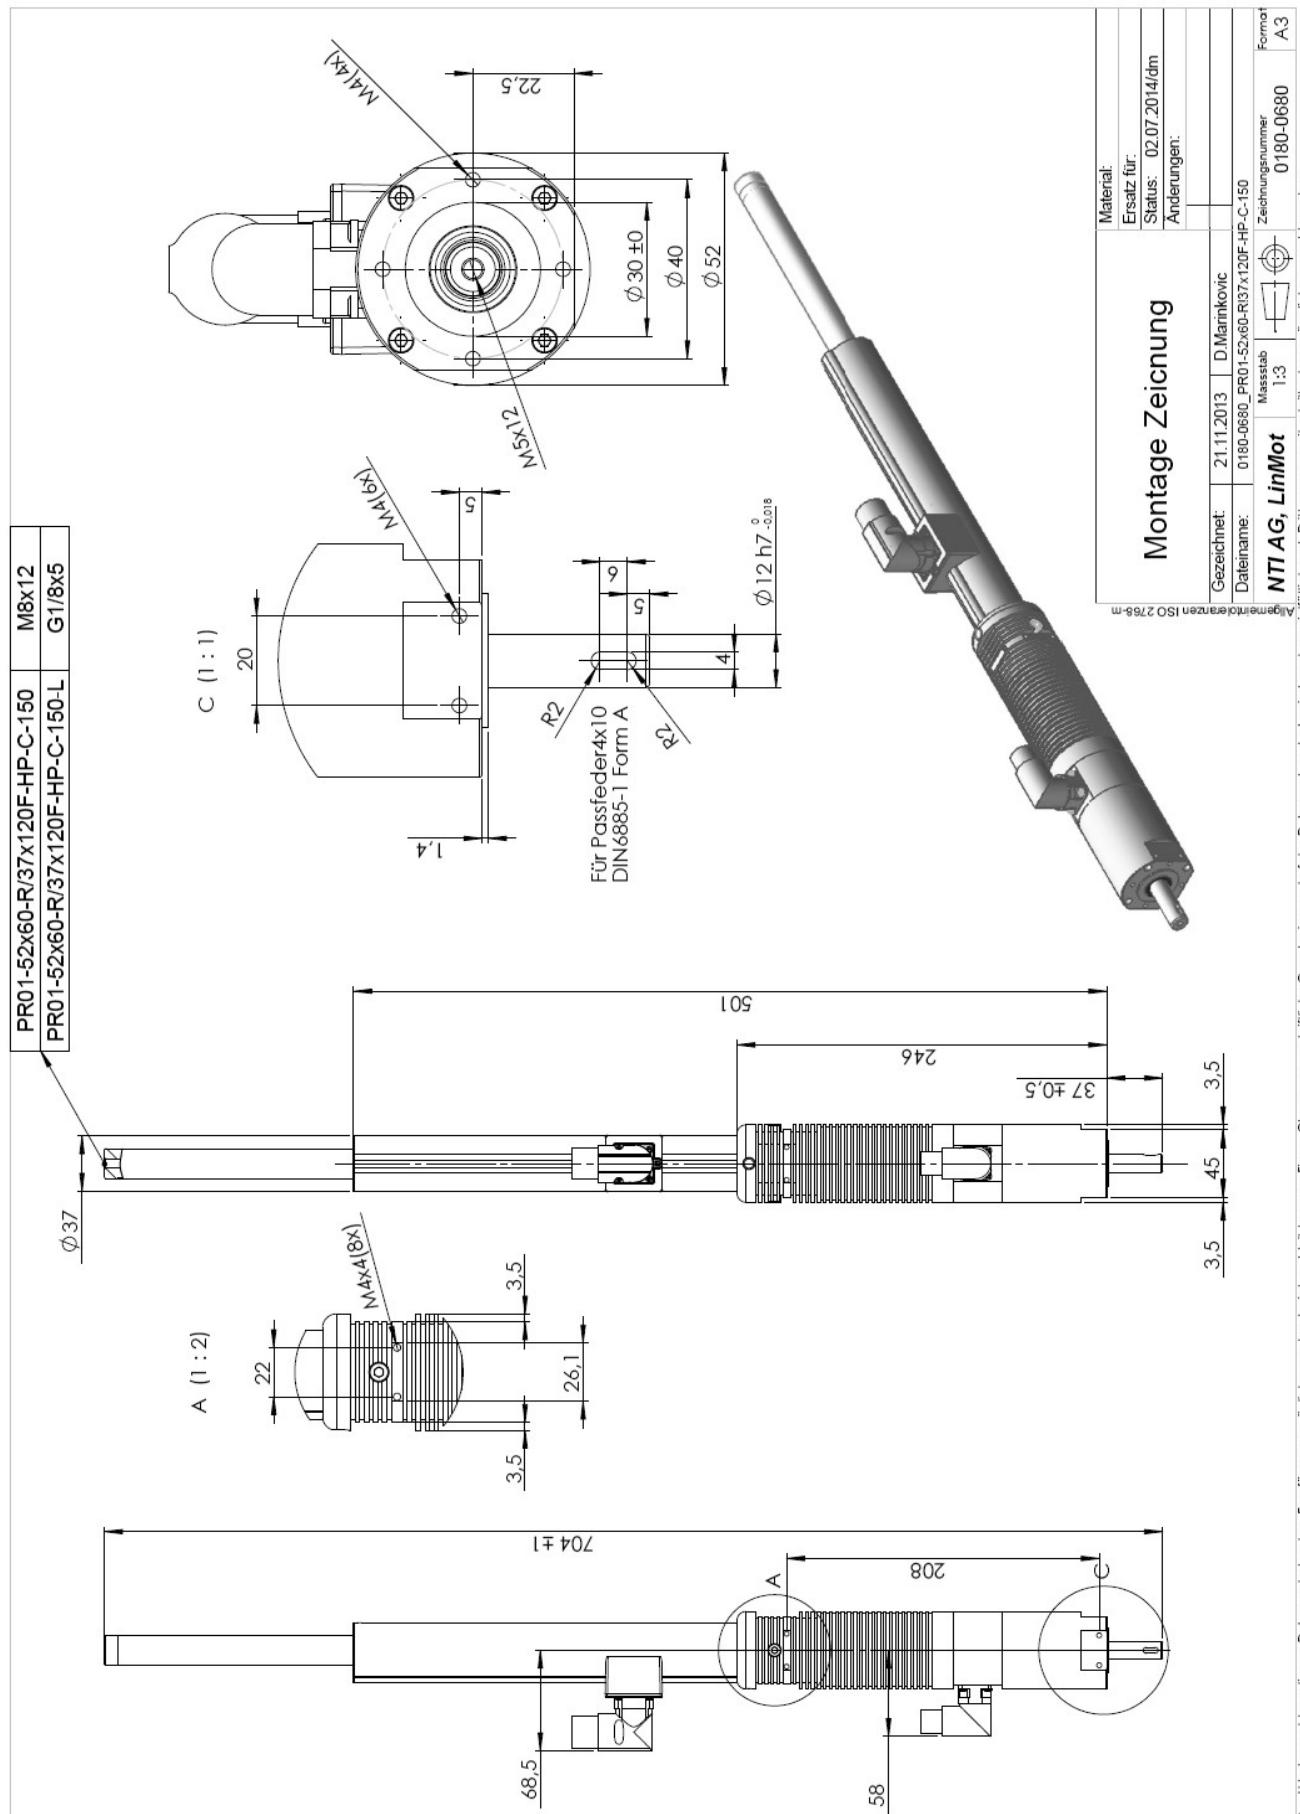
60-R/37x120F-HP-C-100 with MagSpring
